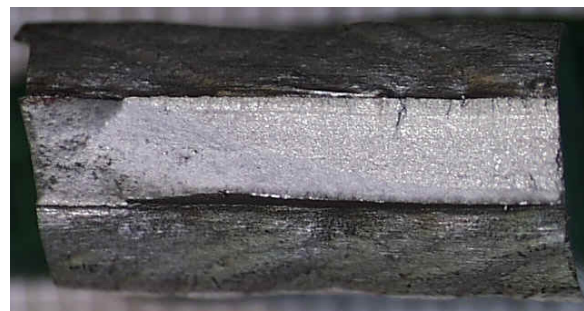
Fracture location of MIG specimens in the as-welded configuration.
